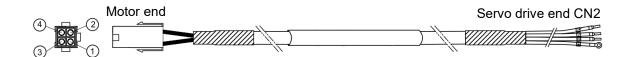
Servo motor power cable (HVPS04AB = MB, without brake cable)
